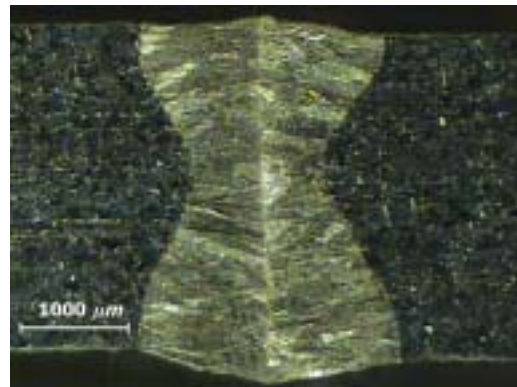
Butt welding Cross-sectional area of the laser beam power at $P=2kW$, $v=1.0m/min$ and $z=-0.5mm$
